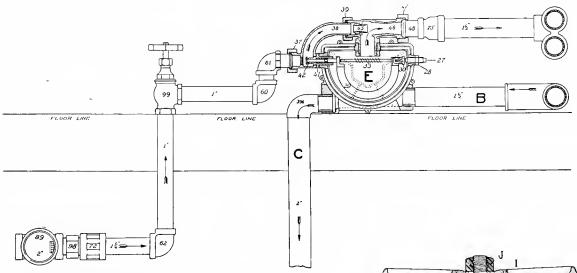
Unotherm and Piping Connections as Arranged Under Seat at Center of Coach.
